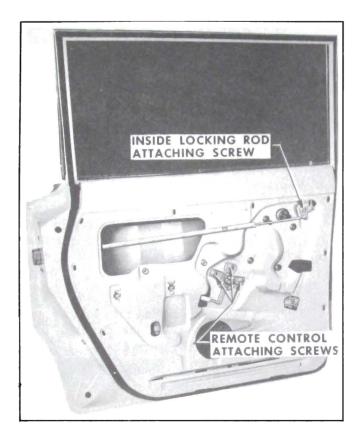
Rear Door Remote Control and Inside Locking Rod Attachment
